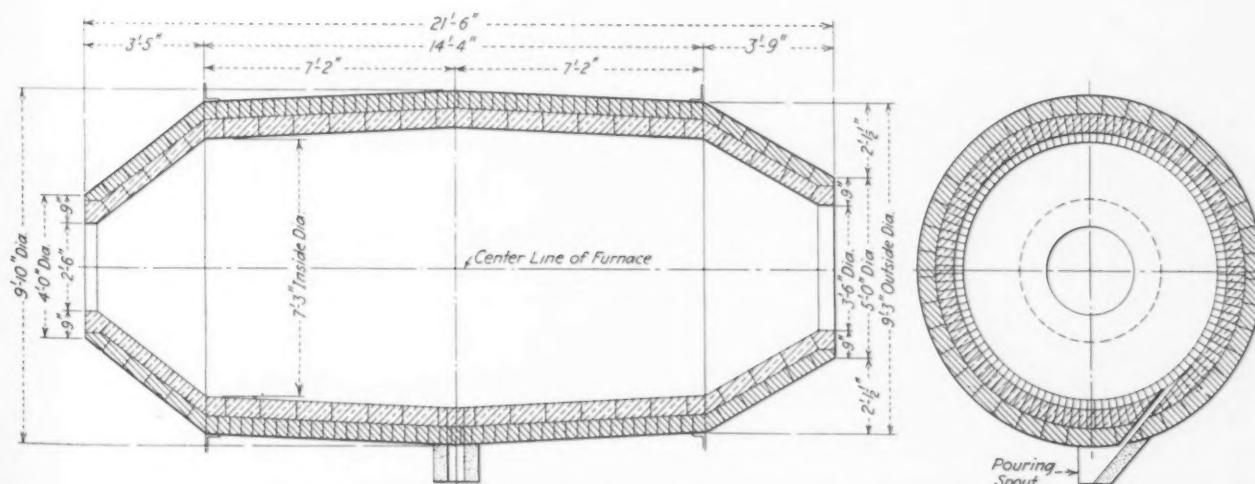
Longitudinal section through the furnace. Notice that pouring is aided by the slope toward center of the cylindrical section.
